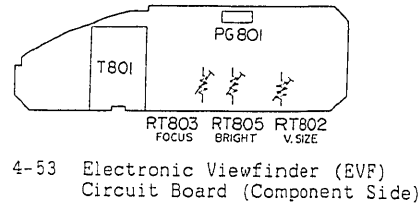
Electronic Viewfinder (EVF) Circuit Board (Component Side)
